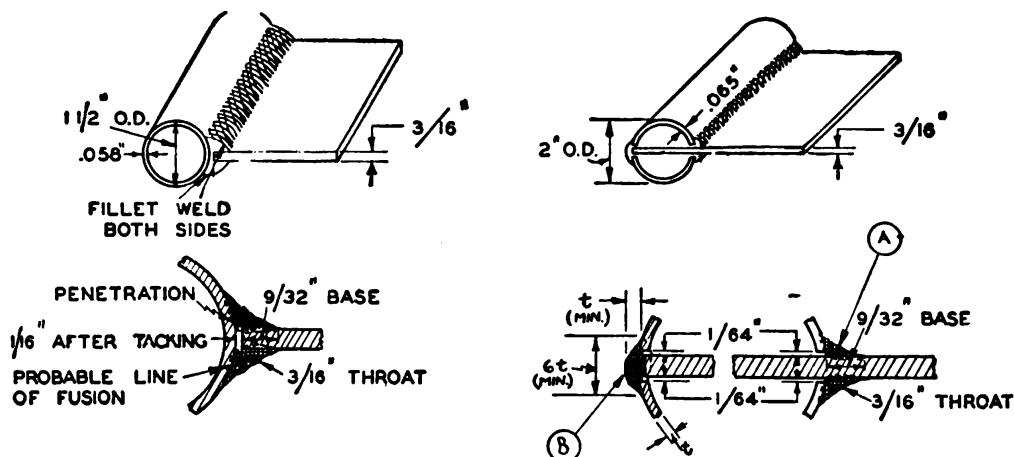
Weld metal specifications for sheet and tube joints.
